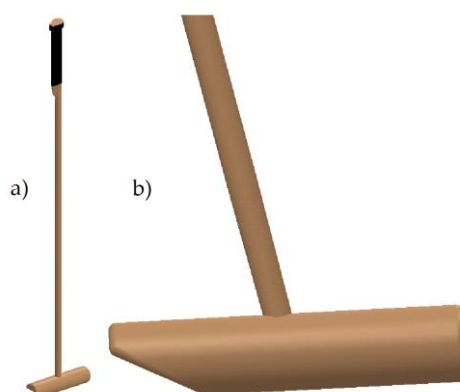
CAD models of the polo mallet. (a) The full shaft with handle and head and (b) the head used to strike the ball during play.
